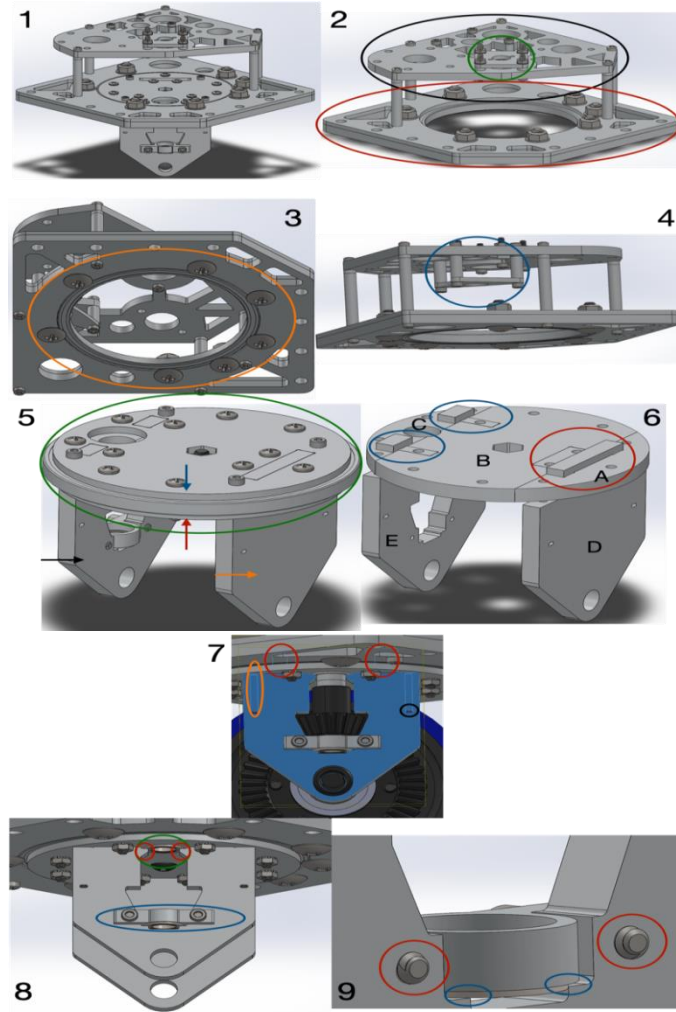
shows the lower structure. The red and blue arrows point to two 0.125" aluminum plates placed above and below the X-Contact bearing. Going through these plates are prongs protruding from the top of the wheel supports, shown by black and orange arrows in the figure. In these prongs are rectangular holes, which are circled in red in image 7. "Sandwiched" between the two 0.125" aluminum plates placed above and below the X-Contact bearing are 3 components, labelled A-C in image 6. Going through components A and C are the wheel supports, labeled D and E in image 6. Going through the rectangular hole in the prong of component D is component A, which has a prong of its own and screws, which run through the two 0.125" aluminum plates and itself. Component A is circular on the outside, with a radius matching the inner ring of the X-Contact bearing and placed inside the inner diameter of the bearing. To allow the key shaft and bevel gear to run through it, component E has two prongs with rectangular holes in them. Running through these rectangular holes are the two prongs of component C, which is supported by screws running through the aluminum plates above and below the bearing.
